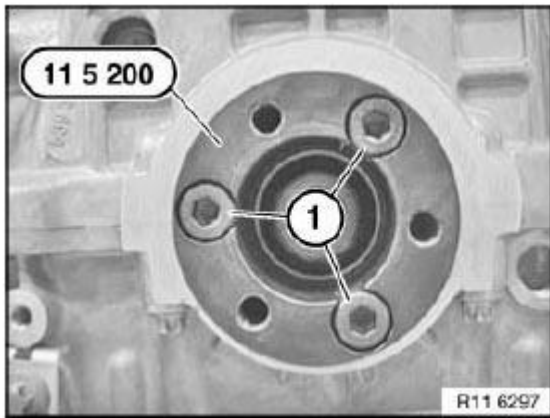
Identifying Special Tool 11 5 200 And Screws
